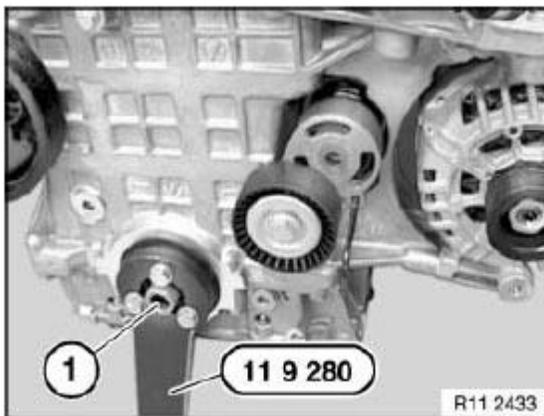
Identifying Central Bolt With Special Tool (11 9 280)
